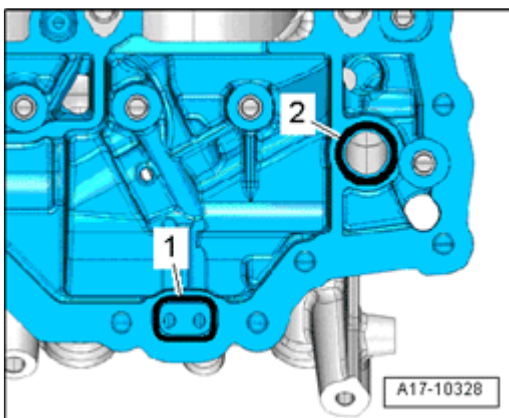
Inserting Seal And O-Ring In Guide Frame
